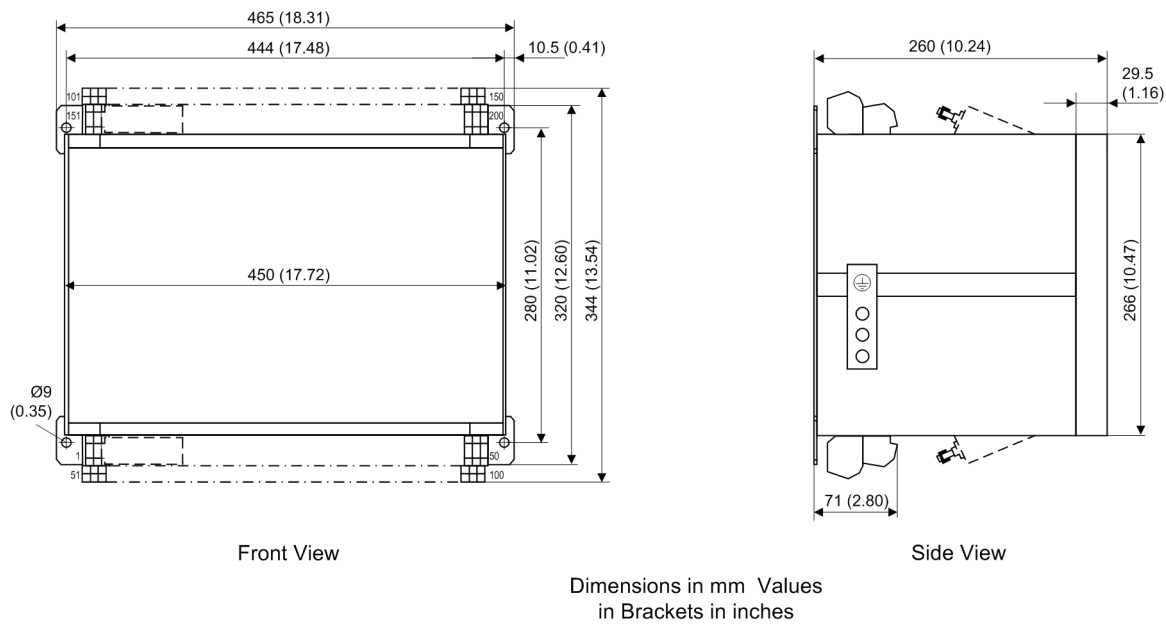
Dimensional drawing of a 7SJ64 for panel flush mounting (housing size $\frac{1}{1}$)
